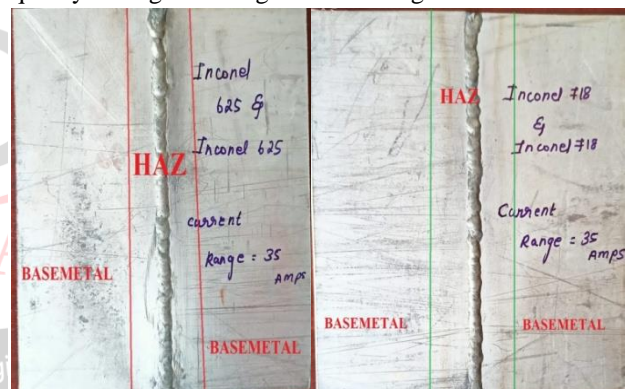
Visual inspection of Welded Plates of Inconel 625 and Inconel 718
